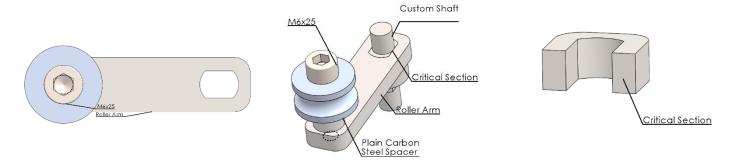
(Left) Top view of actuator arm (Centre) Isometric view of Actuator arm. (Right) Critical cross-section of the actuator arm
